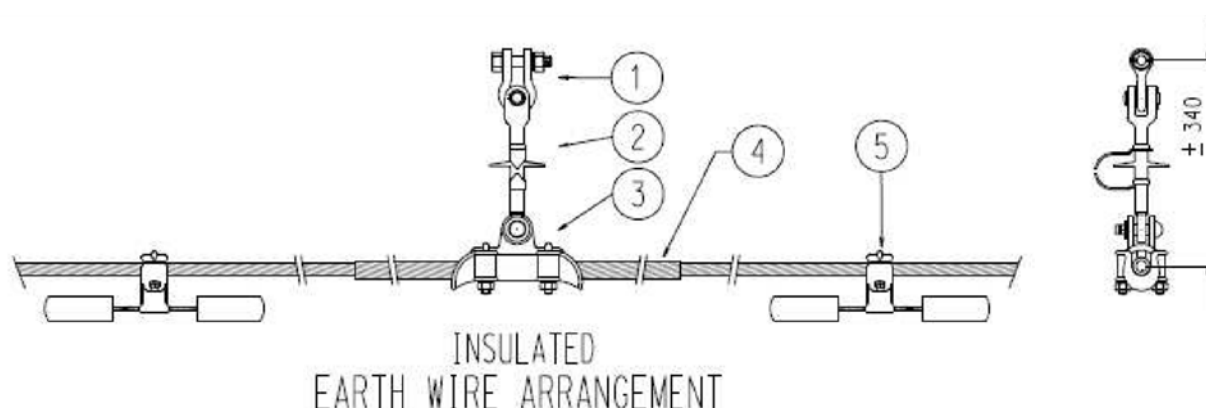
(Insulated Option) Shield Wire Suspension Assembly for Single “Conductor”
